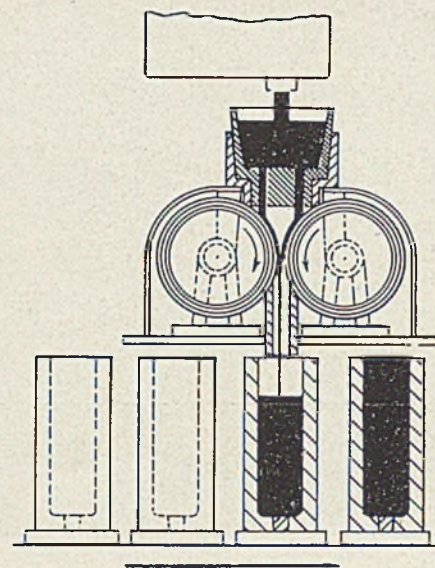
(Right)—Film-impact casting machine. Film propelling cylinders are water jacketed. Heat abstracted by machine, 75 per cent; by mold, 25 per cent—of total to be eliminated
